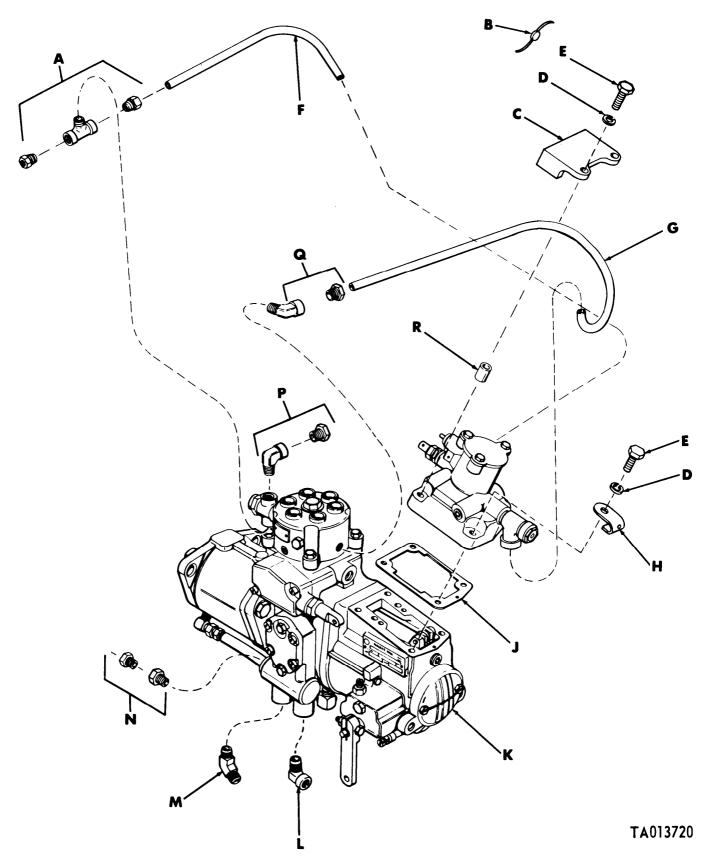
Code C, D and E fuel injection pump assemblies, partial exploded view
